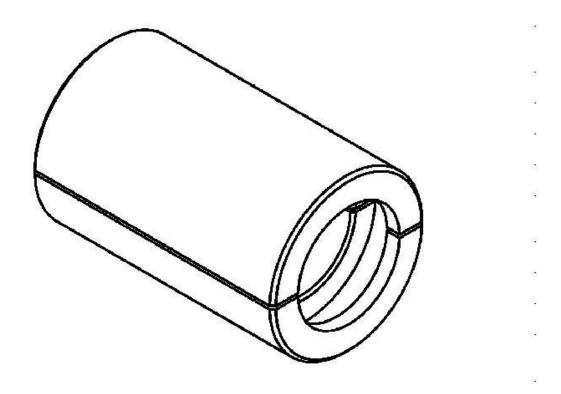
Puller Adapter 8539 Courtesy of CHRYSLER LLC
